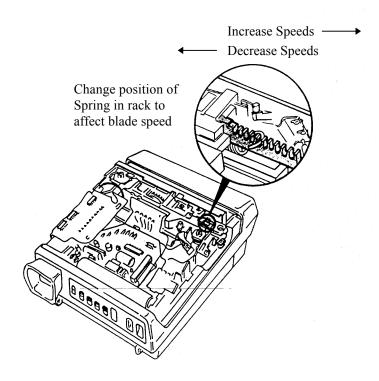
Hybrid Test Adjustment (Opening Blade Spring tension adjustment)
